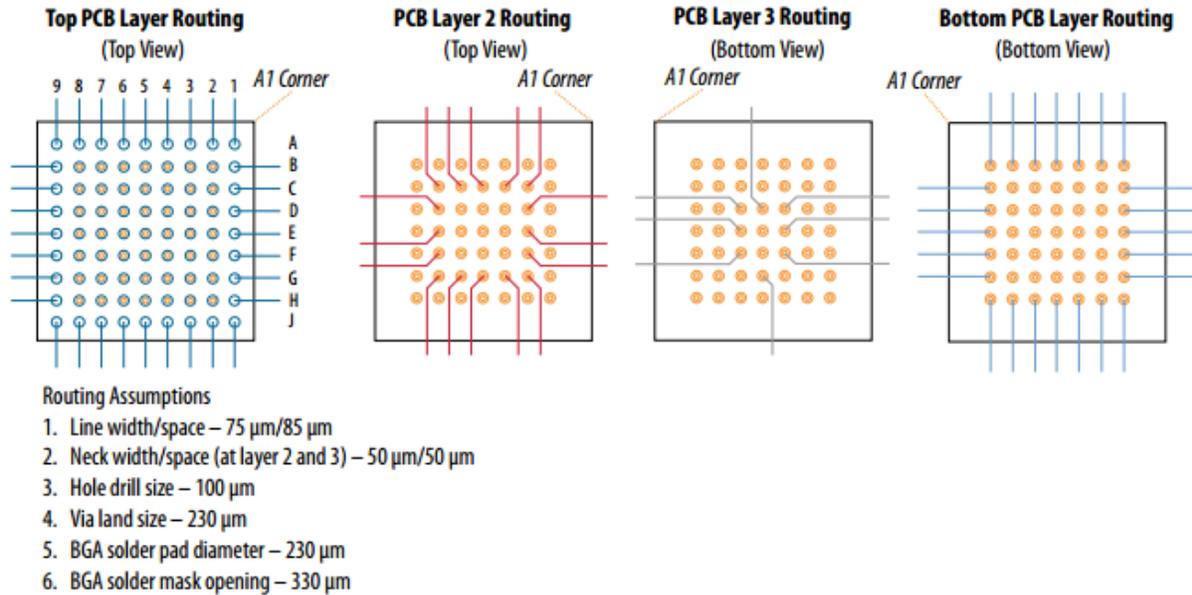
A sample PCB routing scheme on 4 layers for 0.4-mm 81-pin VBGA. From [Intel-17].
